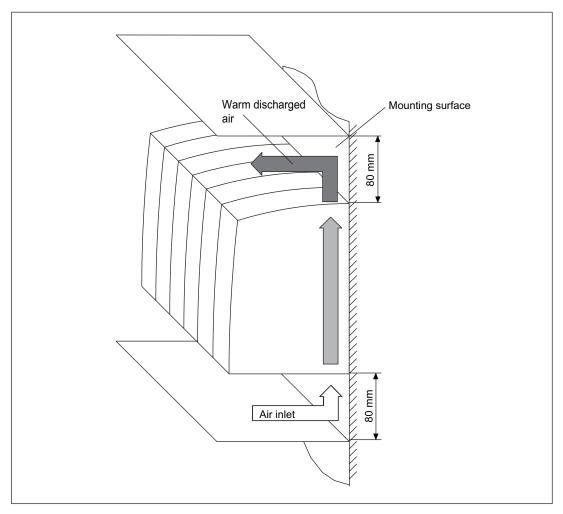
Clearances for booksize drive line-up with internal air cooling
